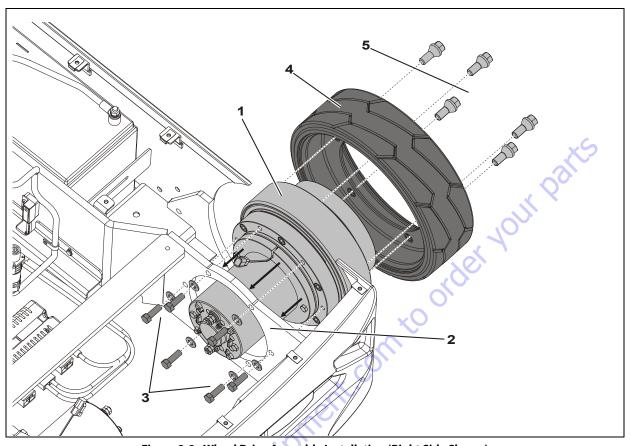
Wheel Drive Assembly Installation (Right Side Shown)
